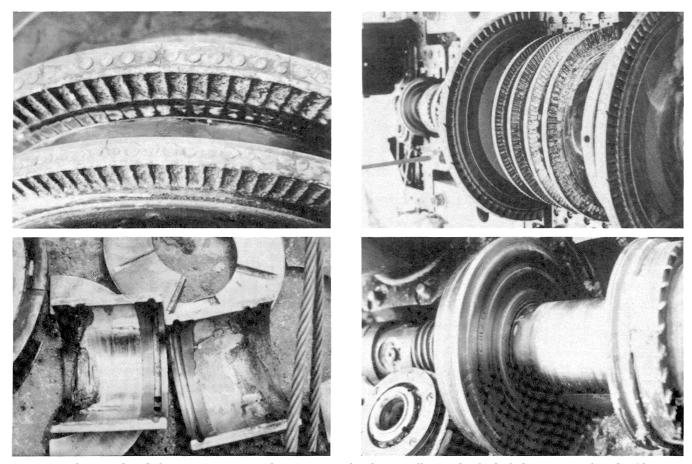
Thrust and Radial Bearing Damage with Hot Tears in the Thrust Collars and Salted Blading on Fourth and Fifth Stages on an 18,000 hp, 10 Stage Turbine.
